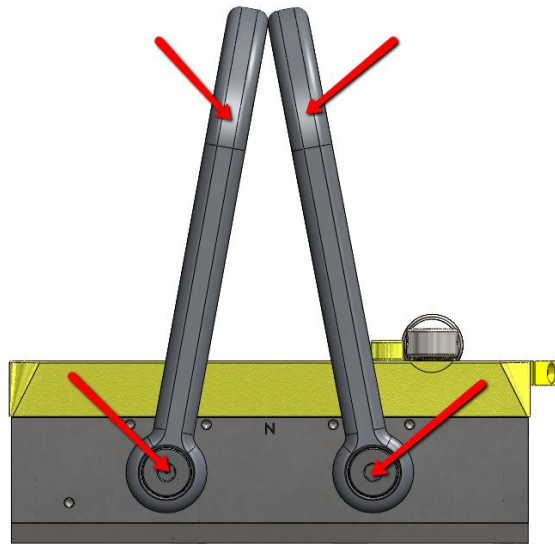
b: Remove Four M12 Shoulder Bolts and Two Lift Lugs
